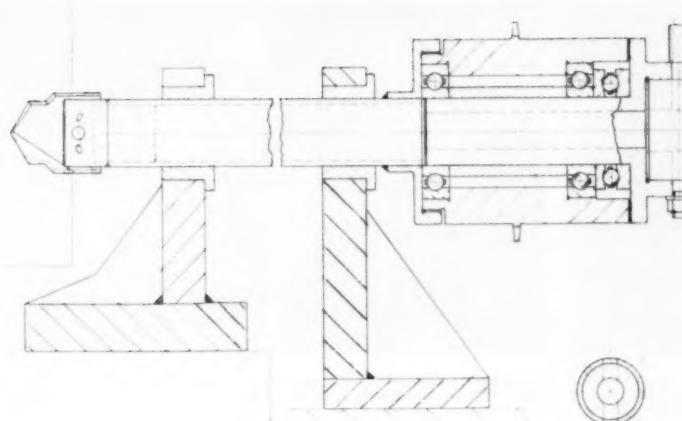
(left).—This fixture locates on the machine table in the conventional manner and adjustment is effected by moving the serrated rings and then again locking them to the inner sleeve
